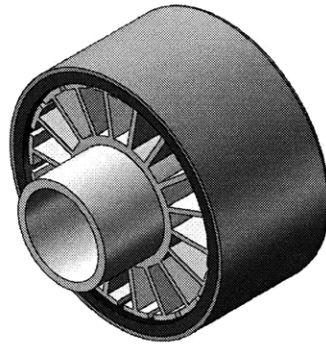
New 1000W 36V Brushless Outrunner Drive Motor
